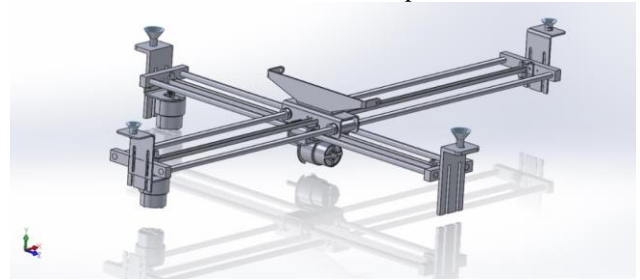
CAD Assembly Model of Automatic Glass Wall Cleaner
